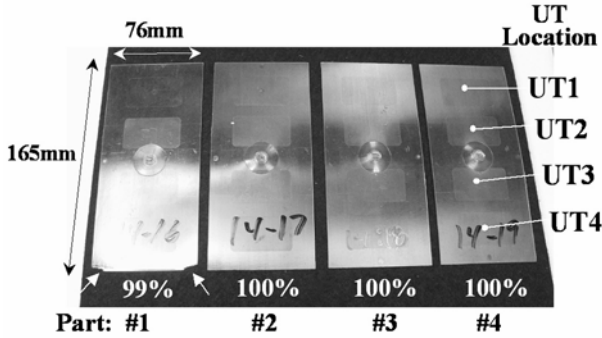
One incomplete (#1) and three complete (#2-4) parts molded successively under the same molding conditions. Filling rate of part #1 was 99%.
